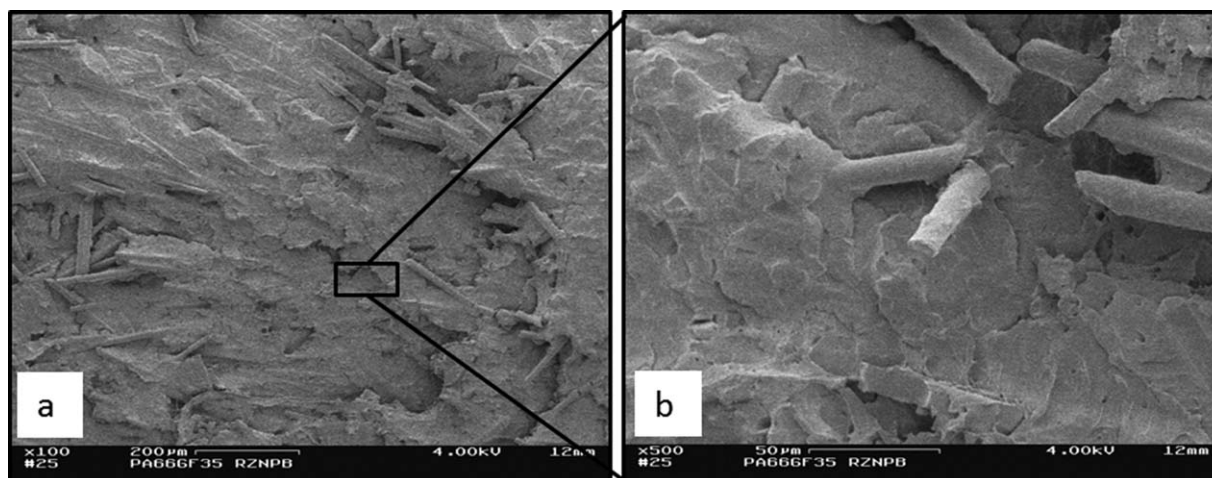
Fracture surface of PA6.6-GF35 standardized fatigue specimen with weld line at RT, $\sigma_a = 20 \text{ N mm}^{-2}$, $R = 0.1$, $N = 328907$ (shear layer): a) shear layer with 100 \times magnification and b) shear layer with 500 \times magnification.
